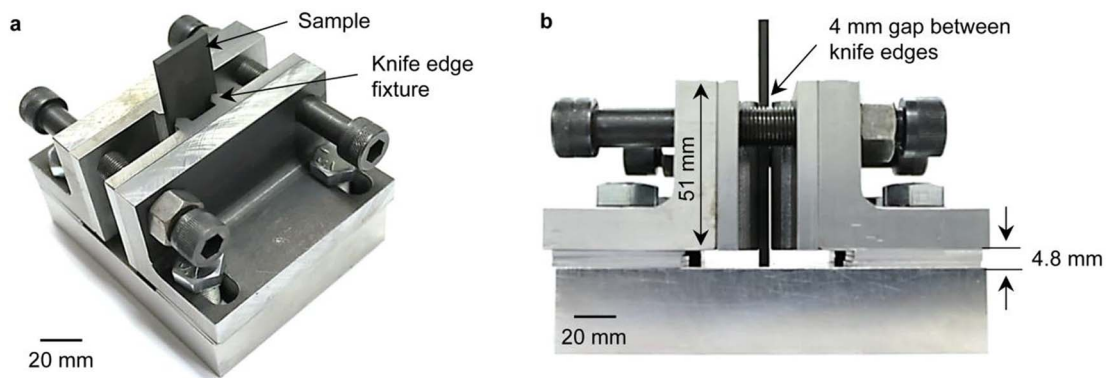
Knife-edge fixture used for crush testing of flat panels. a) Isometric and b) side views of fixture.
